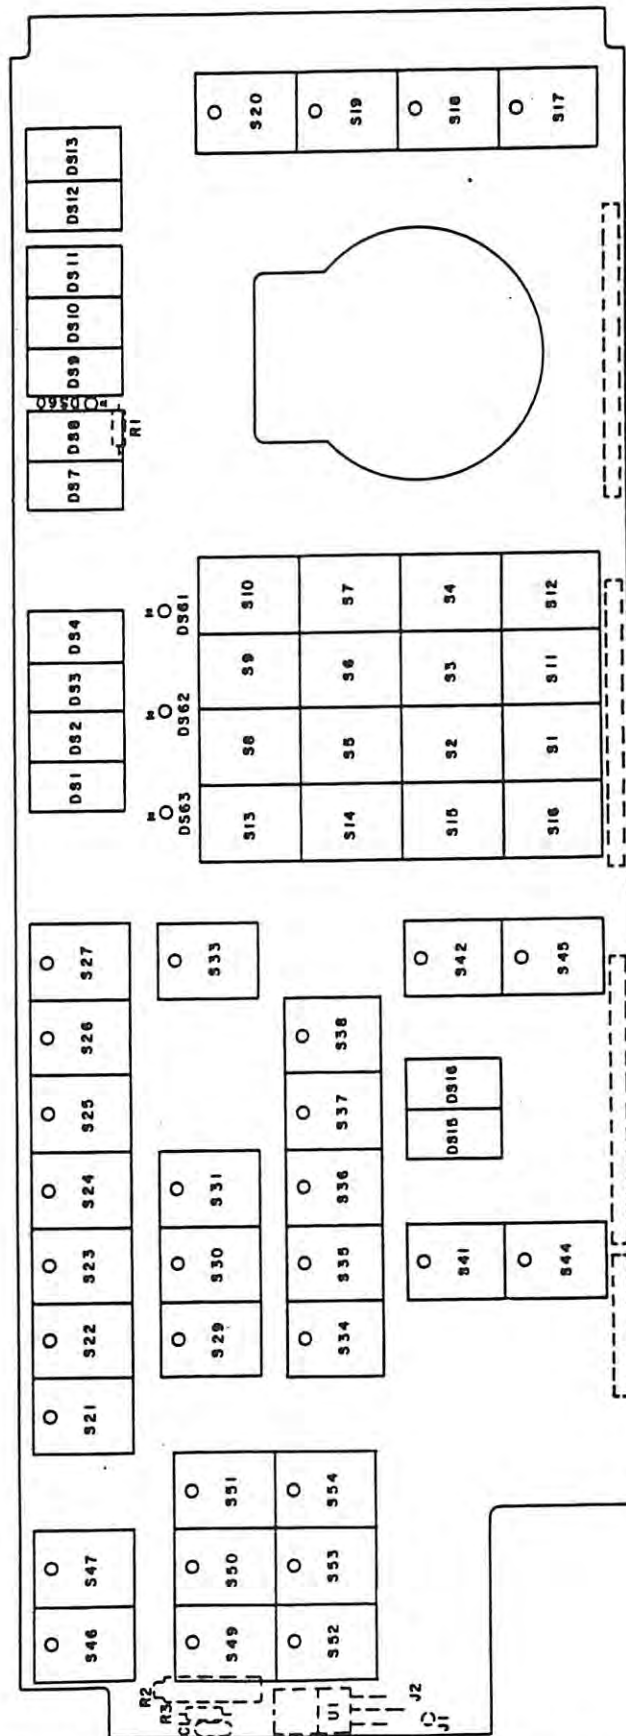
Type 796057-5 Front Panel Switch Board (MFPA1A2)
